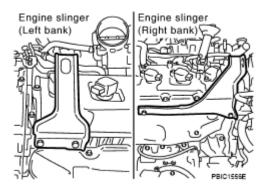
Identifying Engine Slingers Into Front Of Cylinder Head Courtesy of NISSAN MOTOR CO., U.S.A.
